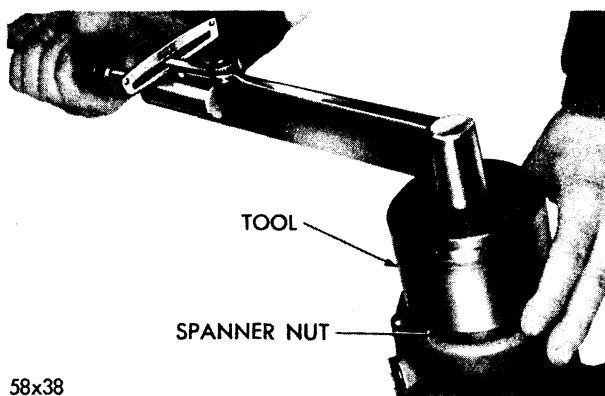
Removing or Installing Gear Shaft and Cover Assembly
